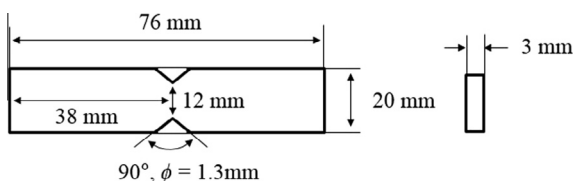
Geometry of composite specimen for shear test using V-notched beam method.
